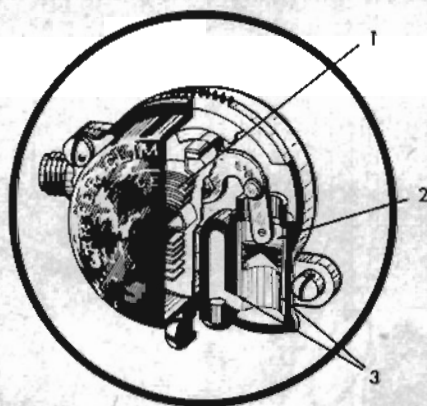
CROSS SECTION OF CHOKE HOUSING
